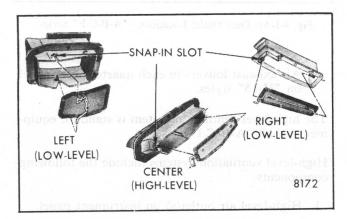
High-Level and Low-Level Air Outlets and Doors - "B- C-E" Styles ("A" Styles Similar)
